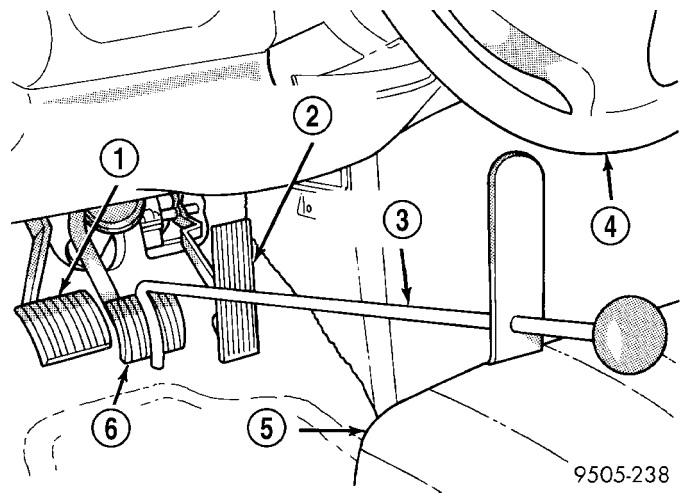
Brake Pedal Holding Tool Installed (Typical)
